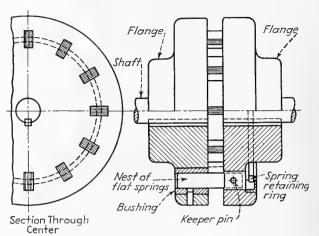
In this Smith & Serrell coupling, flexibility is obtained by laminated pins built up of tempered spring steel leaves. Spring leaves secured to holder by keeper pin. Phosphor bronze bearing strips are welded to outer spring leaves and bear in rectangular holes of hardened-steel bushings fastened in flange. Pins are free to slide endwise in one flange but are locked in the other flange by a spring retaining ring.
